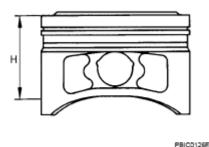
Checking Outer Diameter Of Piston Courtesy of NISSAN MOTOR CO., U.S.A.
